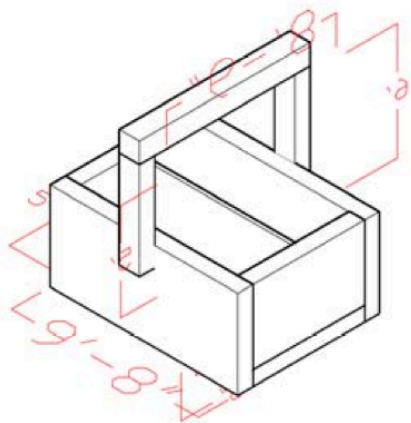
AutoCad drawing of desktop caddy (By Kamau Bethea).
